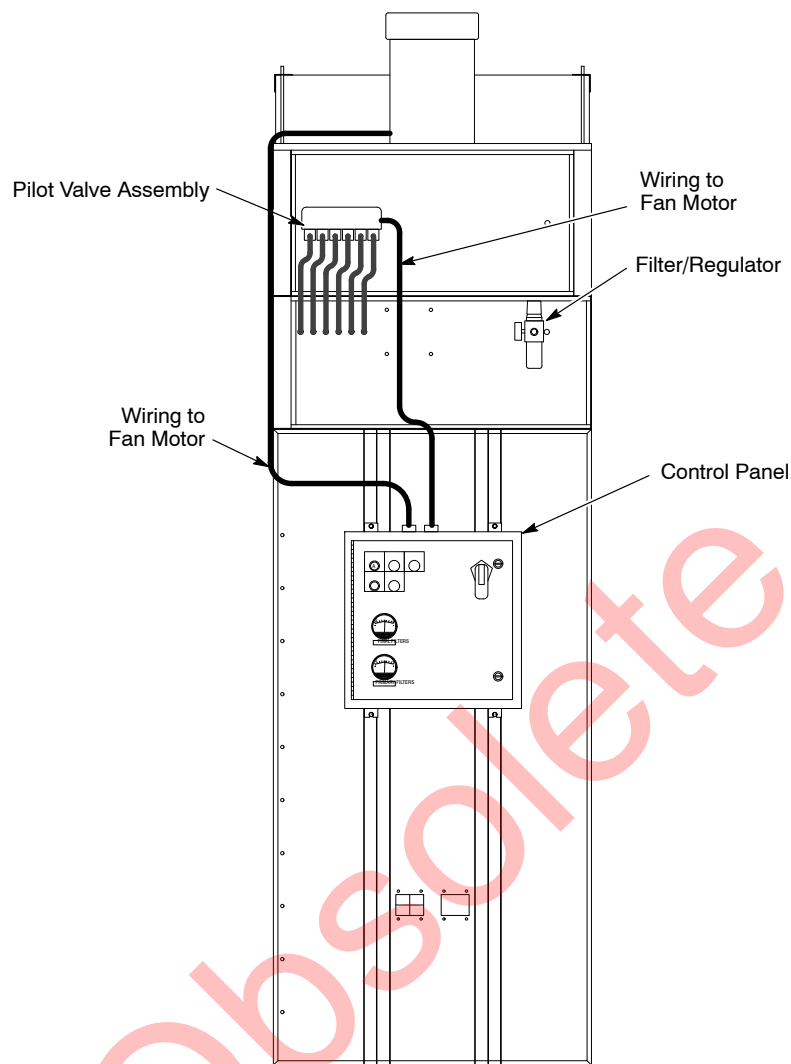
Control Panel, Pilot Valve Assembly, and Filter/Regulator Installation (Left-Hand Orientation Shown)
